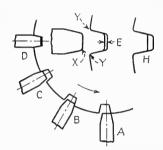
When indexing starts, the lock bolt is released and rides on the periphery of the plate. At point A, it starts to slide down the inclined slot. At B is shown the shearing or wearing action that takes place. In case the plate has overrun or indexed past its position as at C, the spring behind the lock bolt is required to turn the plate, together with the whole rotating mass attached to it, backward, resulting in wear on the side opposite to that shown at B. At D, complete engagement is shown. Rounded corners as at X and Y should be provided. There should be plenty of clearance as at E to allow for wear because of the small angle of the slot. At H is shown an improved form of gear. It assures clearance and provides for grinding of the angular surfaces if necessary. If the lock-bolt spring is not strong enough to seat the bolt by rotating the plate, vibration will usually complete the seating, causing chatter at the cutting tool or spindle and wear on the bolt and slot. In this type of bolt, the angular sides are alike, hence the direction may be opposite from that shown.
